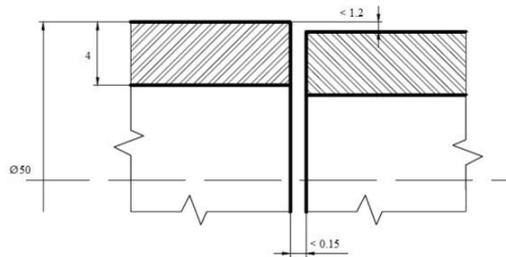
Preparation of Super 304 pipes edges for laser welding
